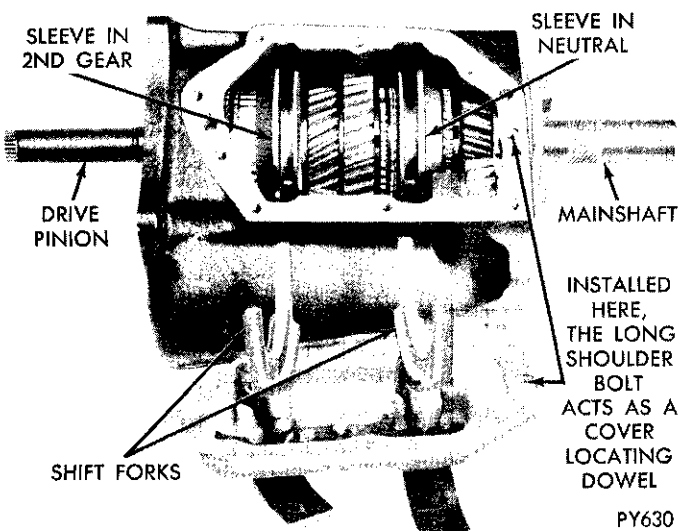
A-230 With Shift Mechanism Assy., Pinion Bearing Retainer, and Extension Housing—Removed
